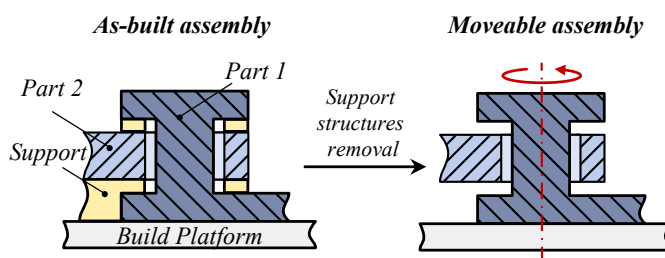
Additive Manufacturing of non-assembly mechanisms by FDM using the example of a revolute joint.
